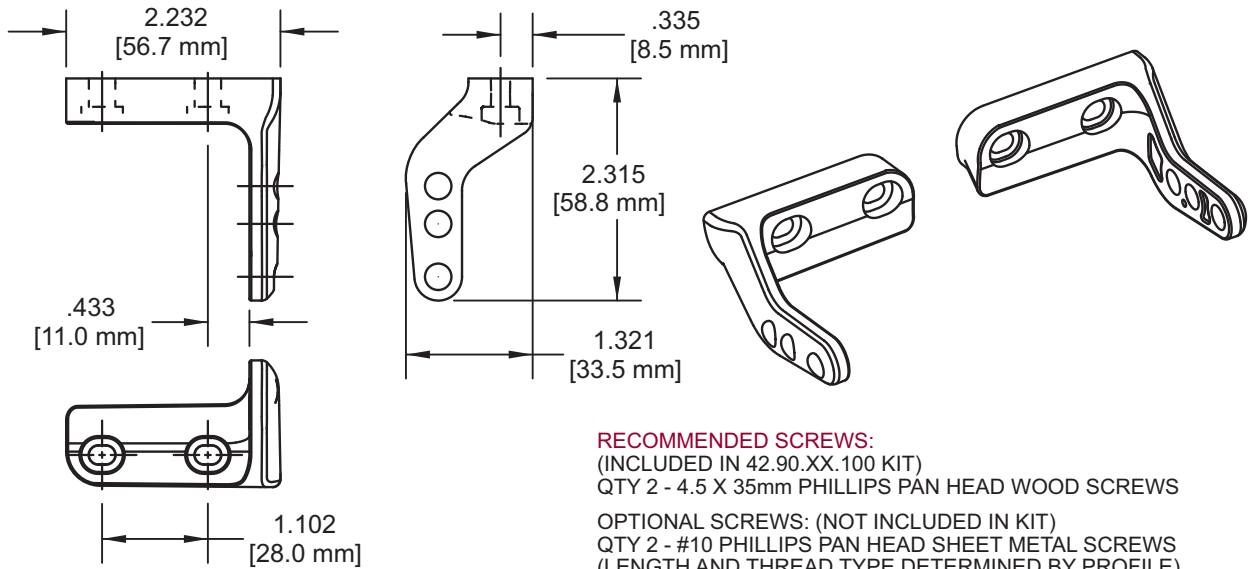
HANDED SILL MOUNT BRACKET "B"
